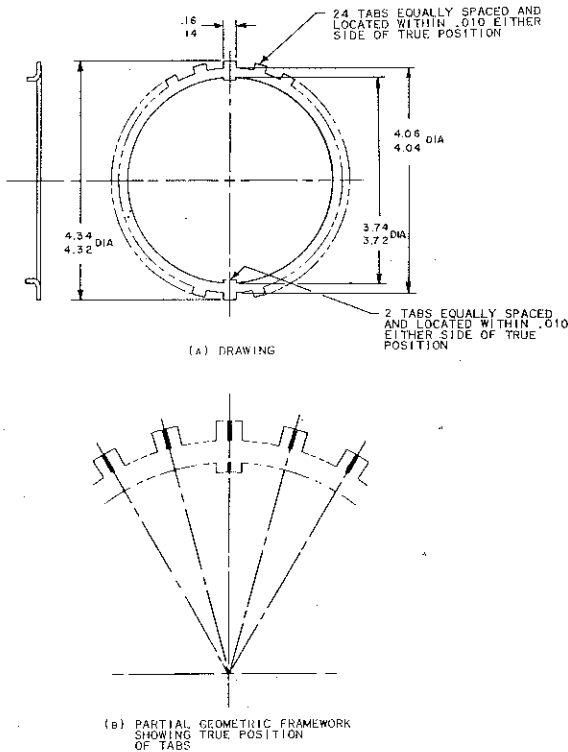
This illustrates the application of true position dimensioning to locate and tolerance a pattern of tabs.
